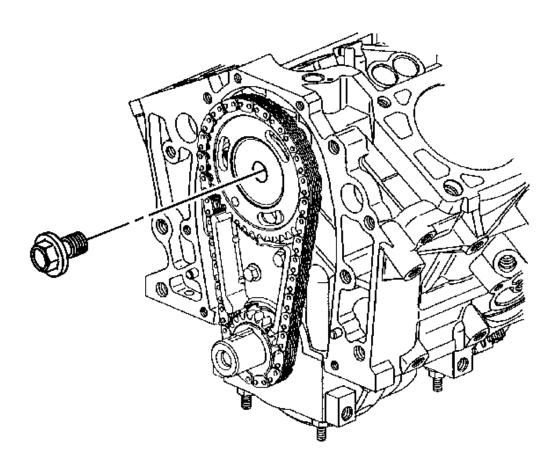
Aligning The Dowel In The Camshaft With The Dowel Hole In The Camshaft Sprocket Courtesy of GENERAL MOTORS CORP.
